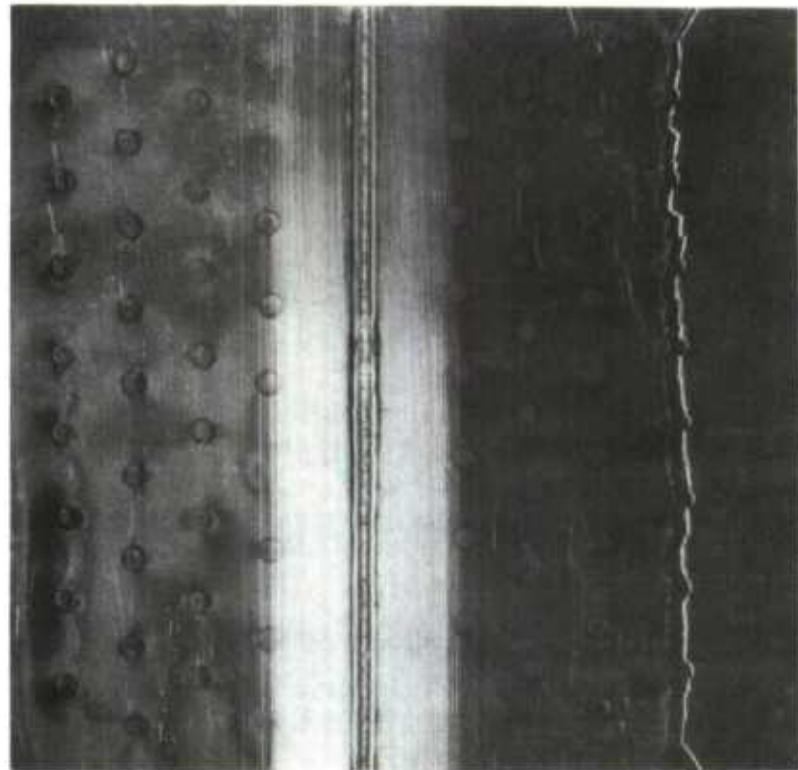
Fractured Fatigue Specimens - 304 SS (78° F)
